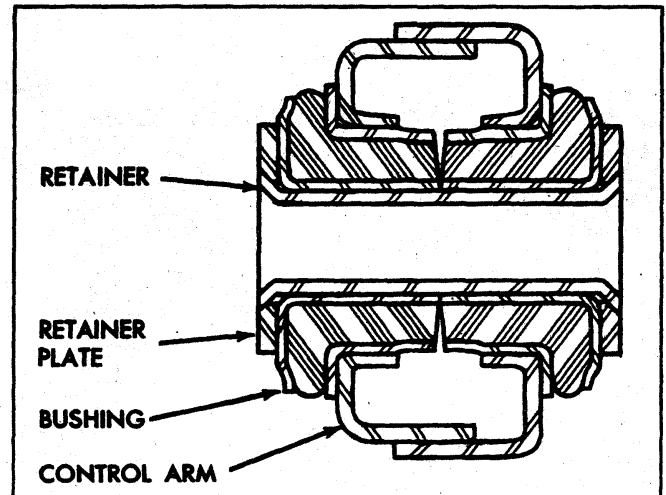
Torque Control Arm Bushing Cross-Section (Corvette)
